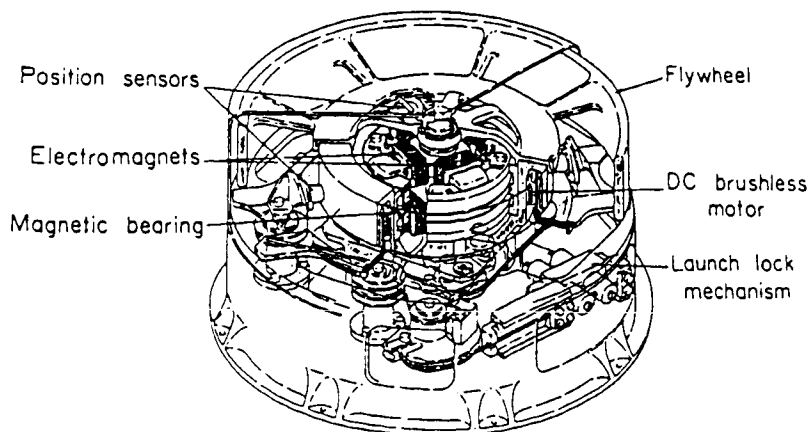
Cross-sectional View of Magnetic Bearing Flywheel for Space Experiment
